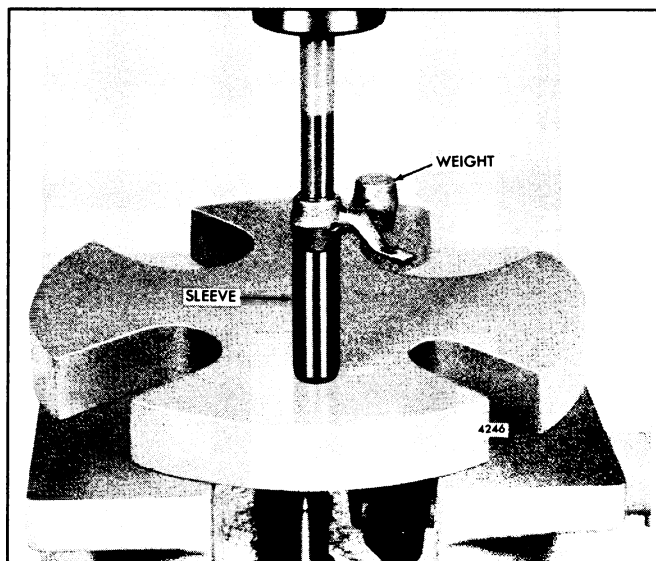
Removing or Installing Governor Weight Bearings using Tool J 8985
